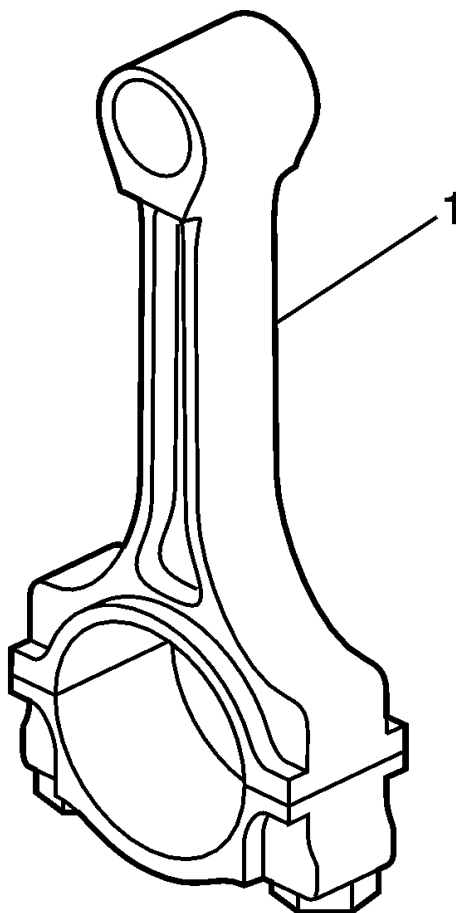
Identifying Piston Pin And Connecting Rod
